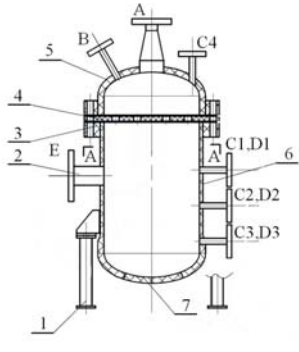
Schematic view of the air impact equipment. A, inlet; B, pressure relief valve; C, force sensor; D, pressure sensor; E, window; 1, bracket; 2, support lug; 3, flange; 4, spreader plate; 5, upper head; 6, cylinder and 7, porous bottom plate.
